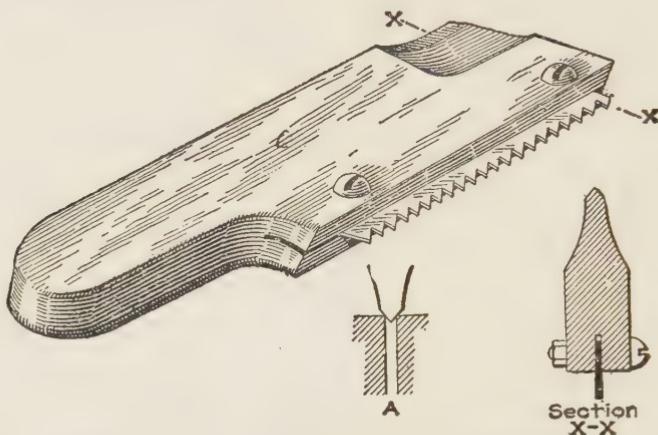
SHORT SAW BLADE CLAMPED IN VULCANIZED FIBER HOLDING
